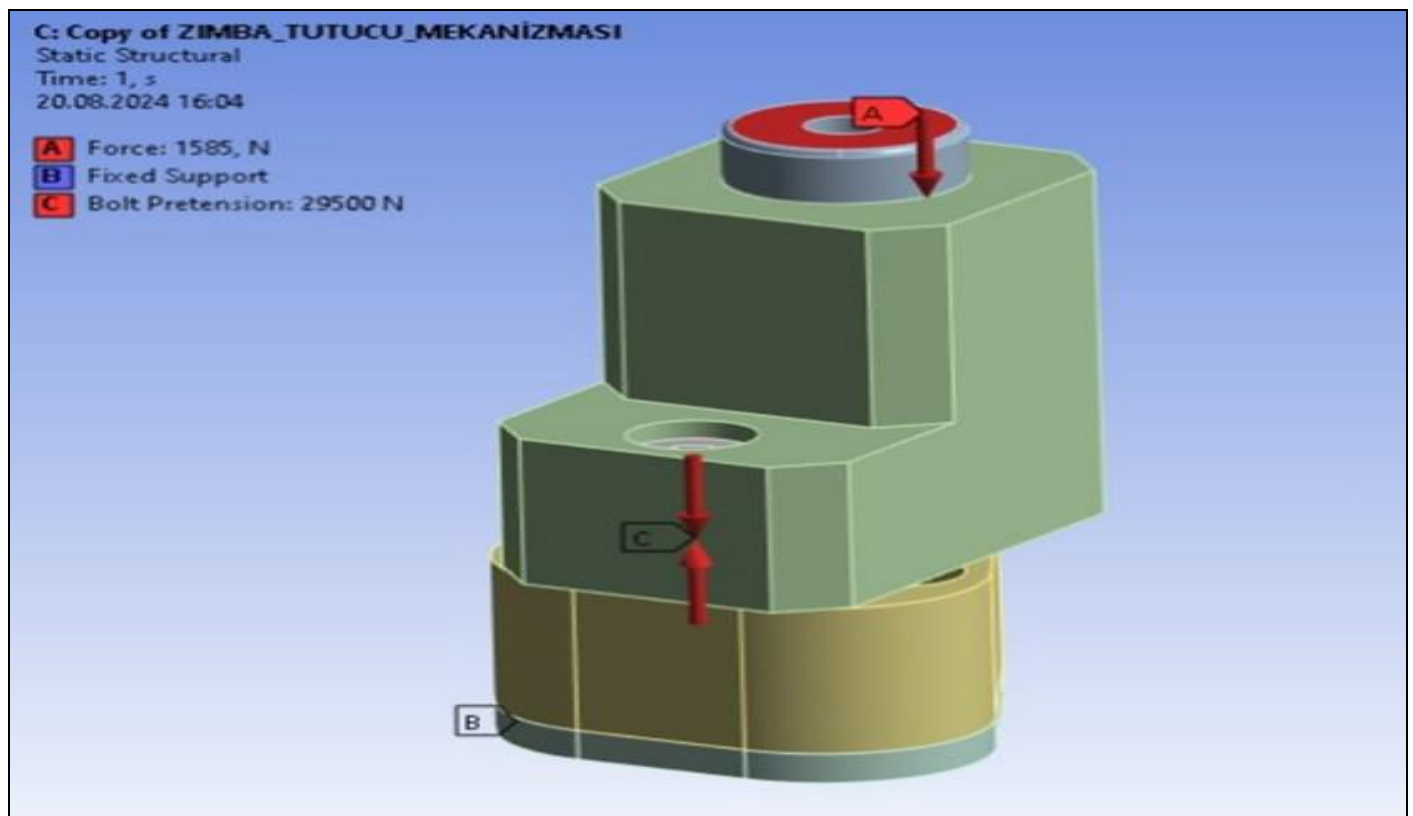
Boundary Conditions of the L-Shaped Punch Holder
